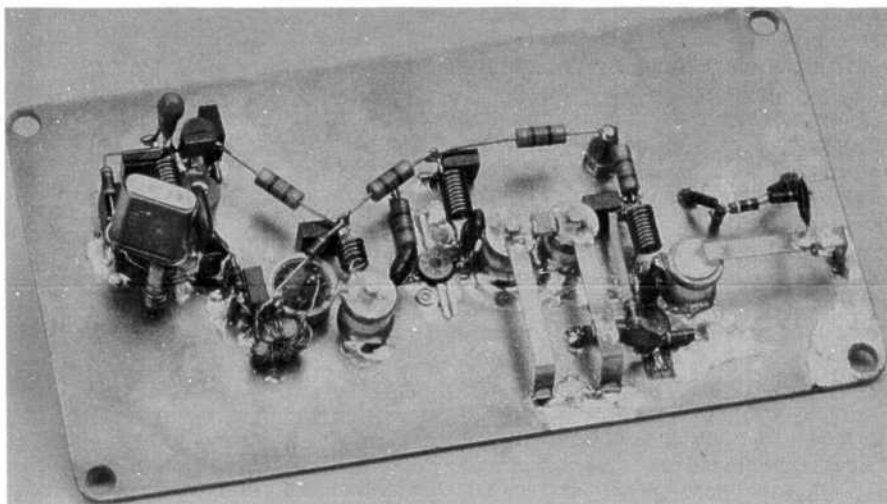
Dead roach construction techniques were used on this 404-MHz local oscillator built by Paul Drexler, WB3JYO. Components are supported by the connector, feedthrough capacitor and the piston trimmer capacitors. Remember that with this construction technique, the ground for RF is on the component side of the board.
